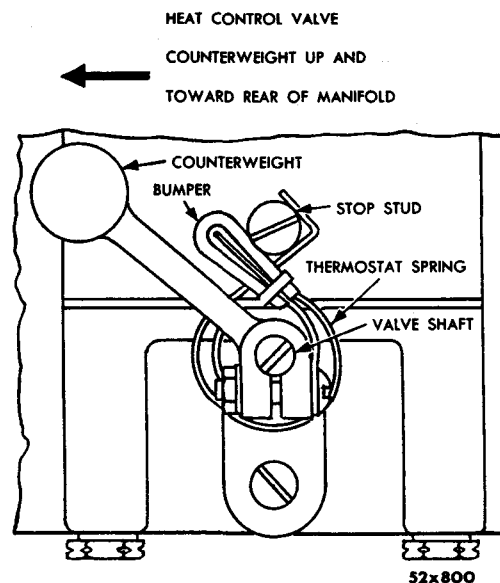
Position of Universal Manifold Heat control Valve Counterweight for downdraft Intake and Front Exhaust and Updraft Intake and Rear Exhaust
